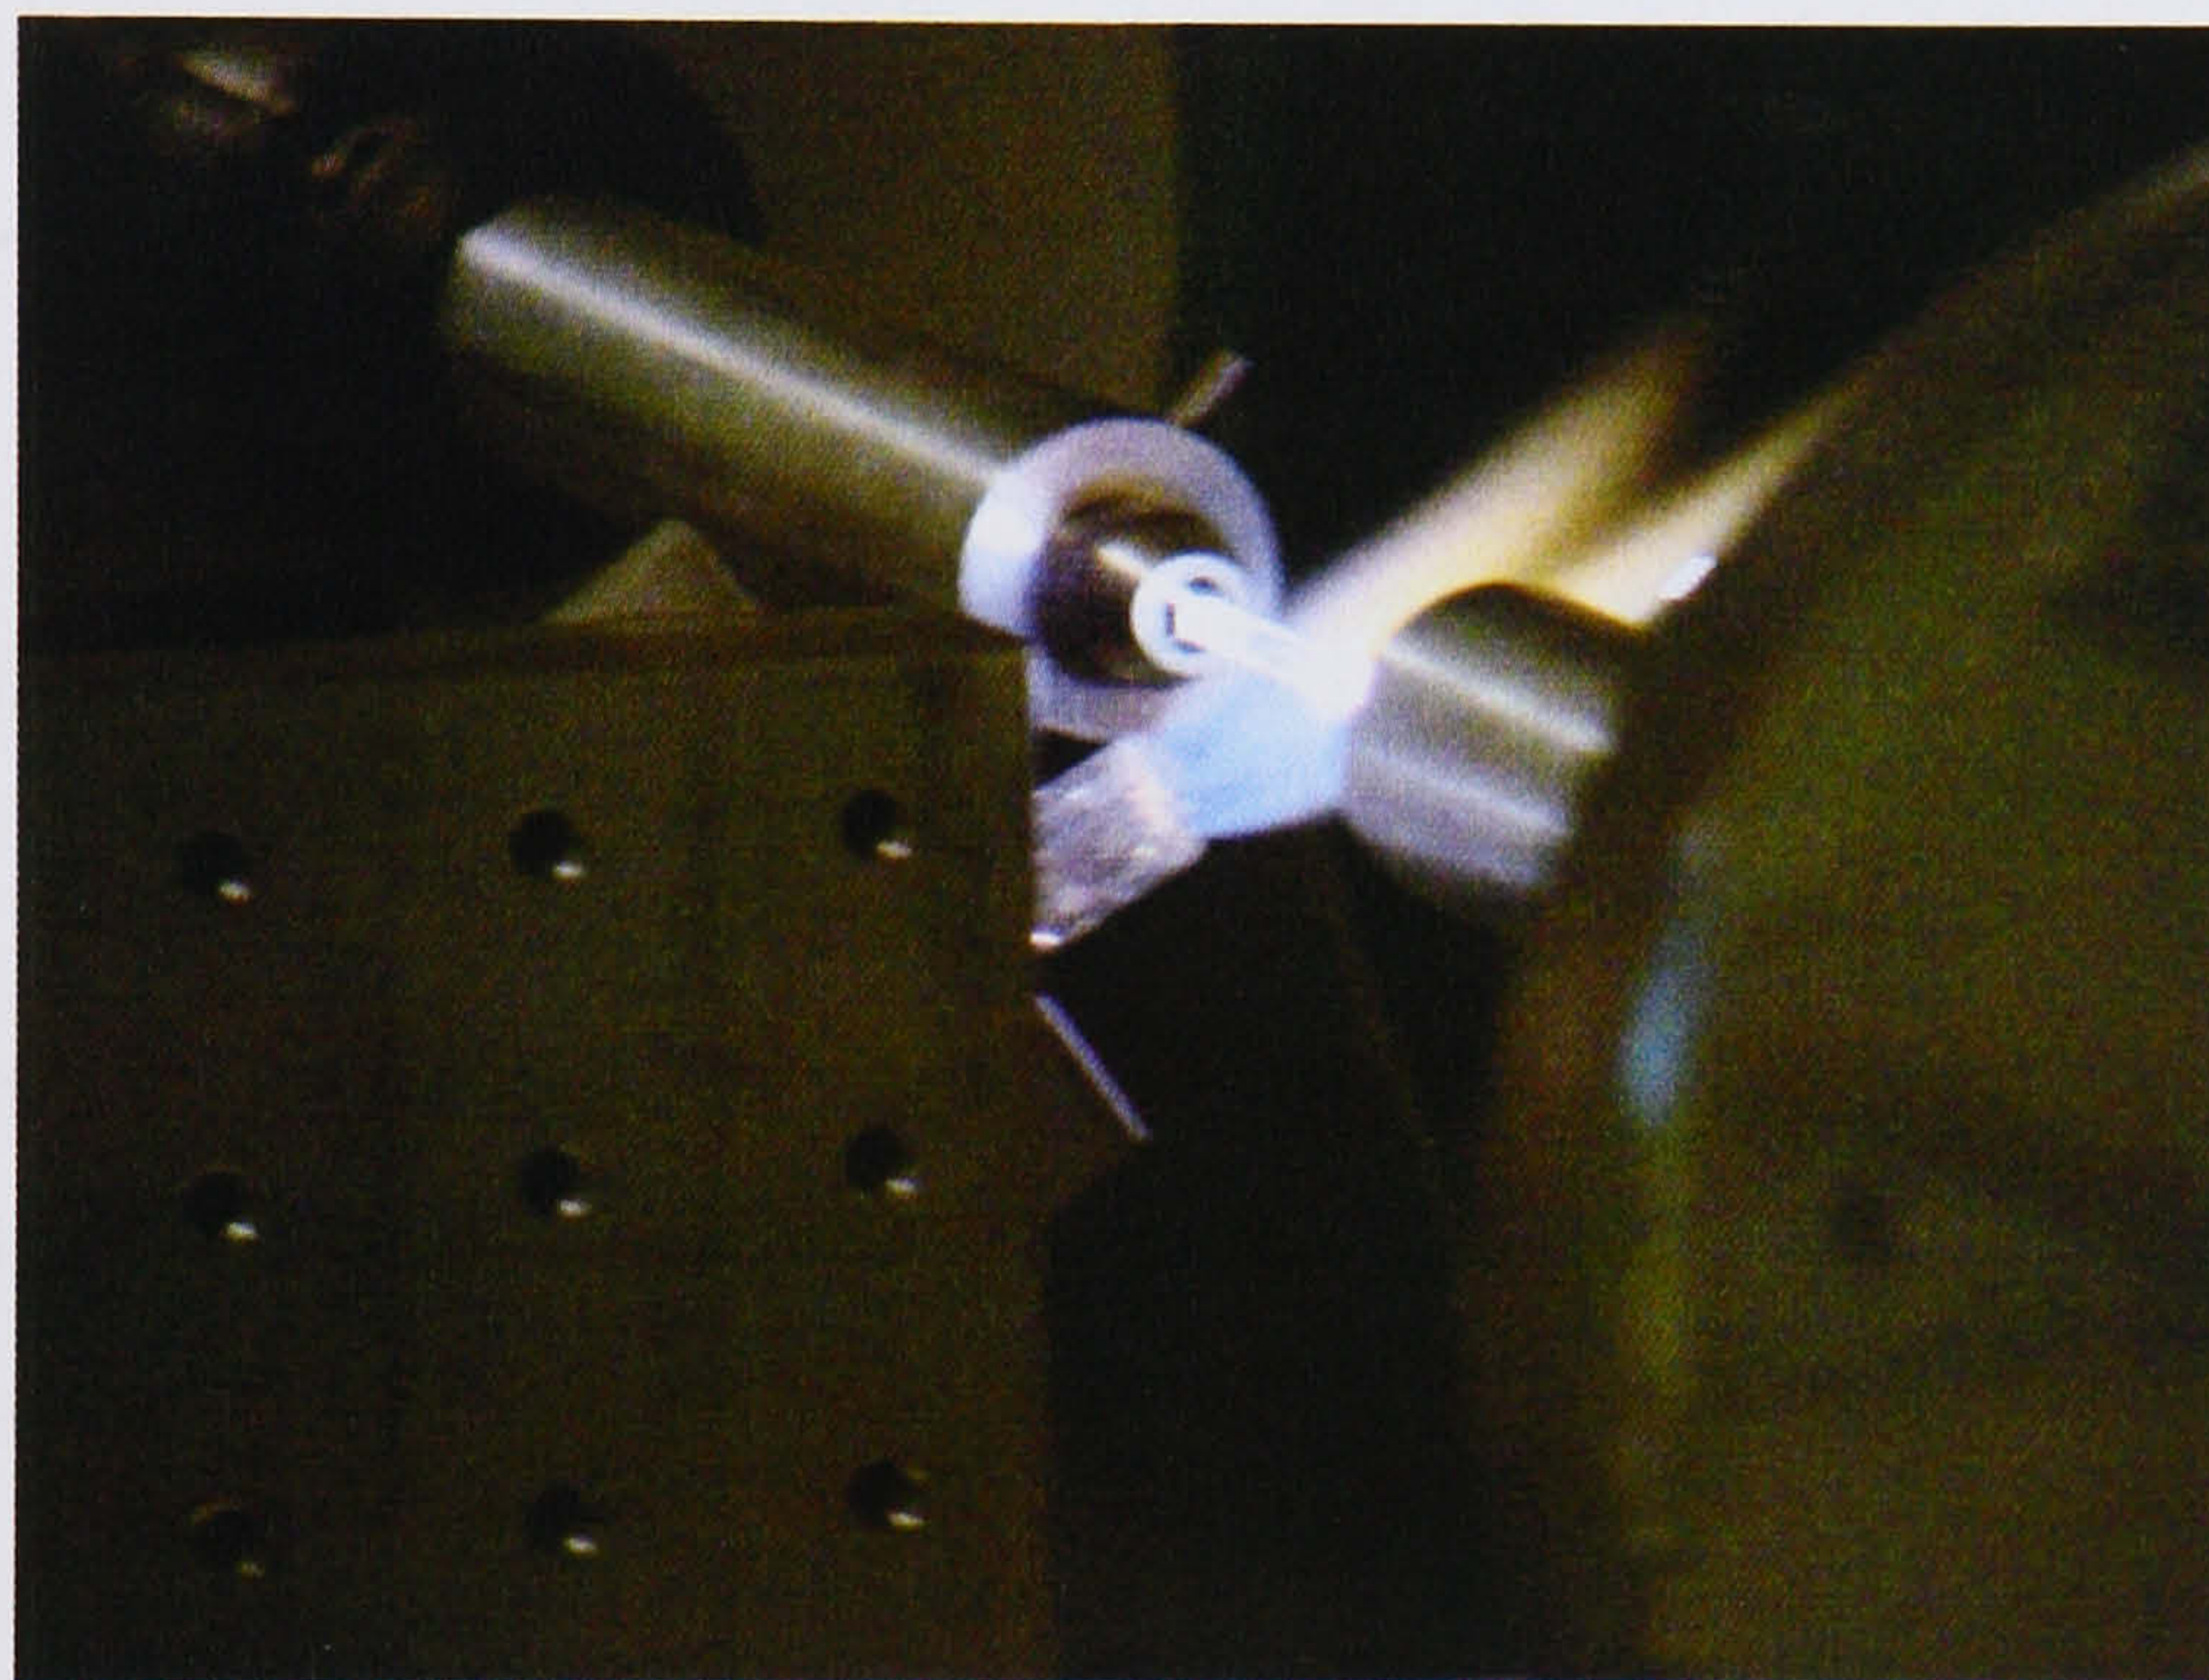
Silica rod is heated before pulling using a glass working lathe using a feed and pull system well suited to producing variable cross section fibres.
